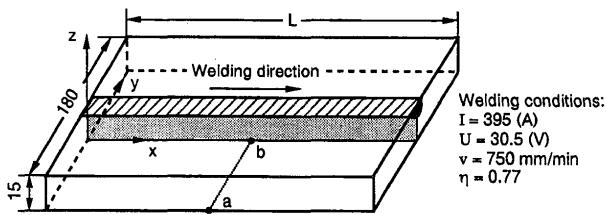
Model and welding conditions for bead-on-plate welding.
